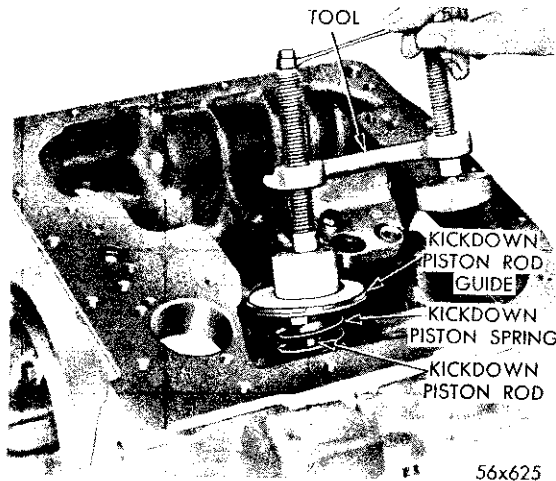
Removal and Installation of Kickdown Piston Rod Guide and Spring
